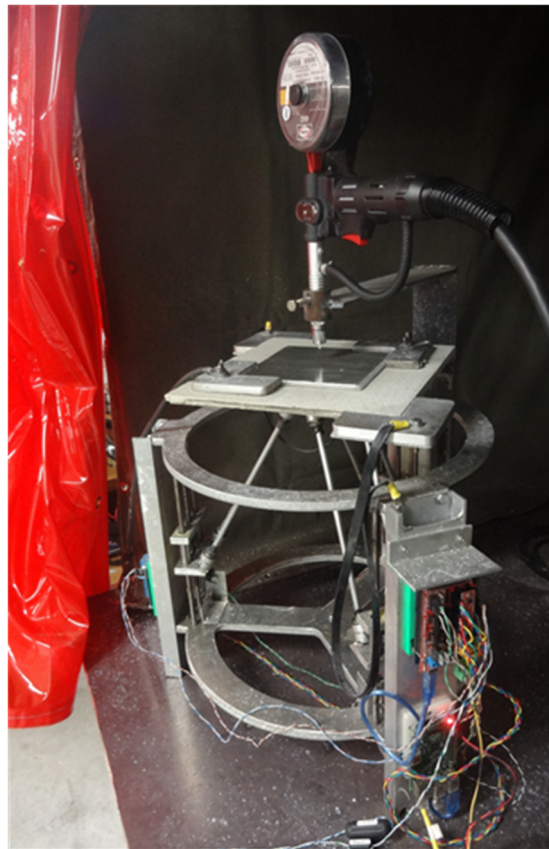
Photograph of magnetic ball joint metal RepRap 3-D printer used in this study. A Miller Spoolmate 100 weld gun supplied the feedstock material which was melted by a Millermatic 190 gas metal arc welders (GMAW) (not shown). In the photograph the open source Raspberry Pi and Arduino based electronics are visible on the right support column.
